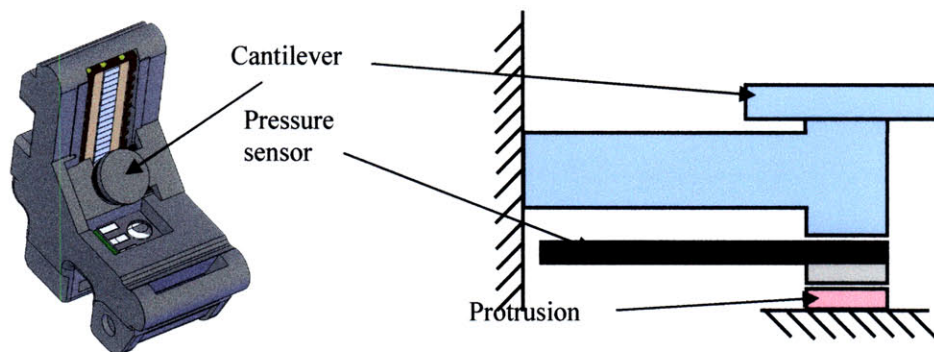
CAD drawing and illustration of the cantilever mechanism used to apply localized pressure.
